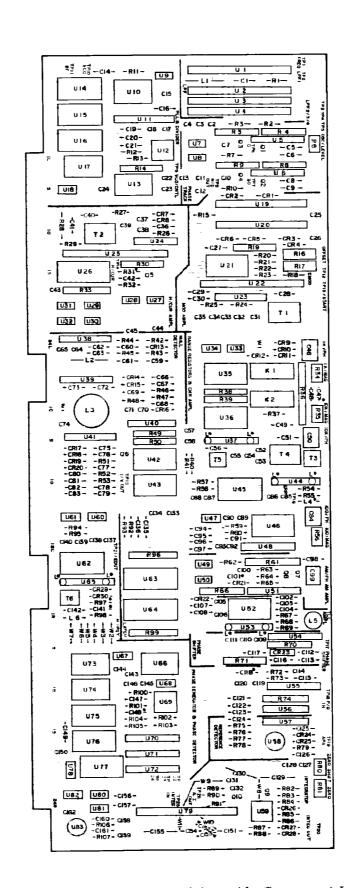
A2 ANALOG Board Assembly Component Locations.
